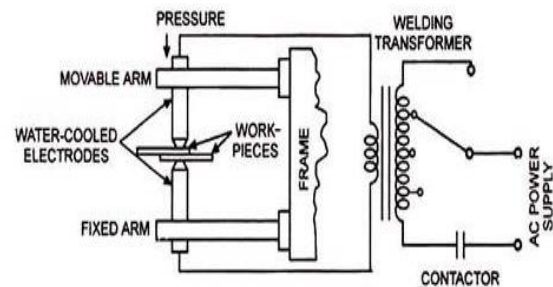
Electrical Circuit For Resistance Welding
